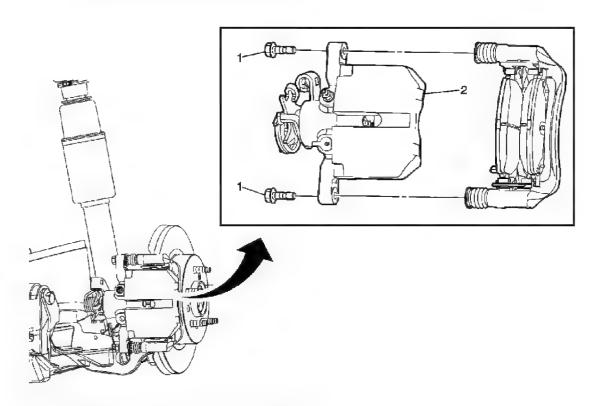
Replacing Rear Brake Caliper Courtesy of GENERAL MOTORS CORP.
